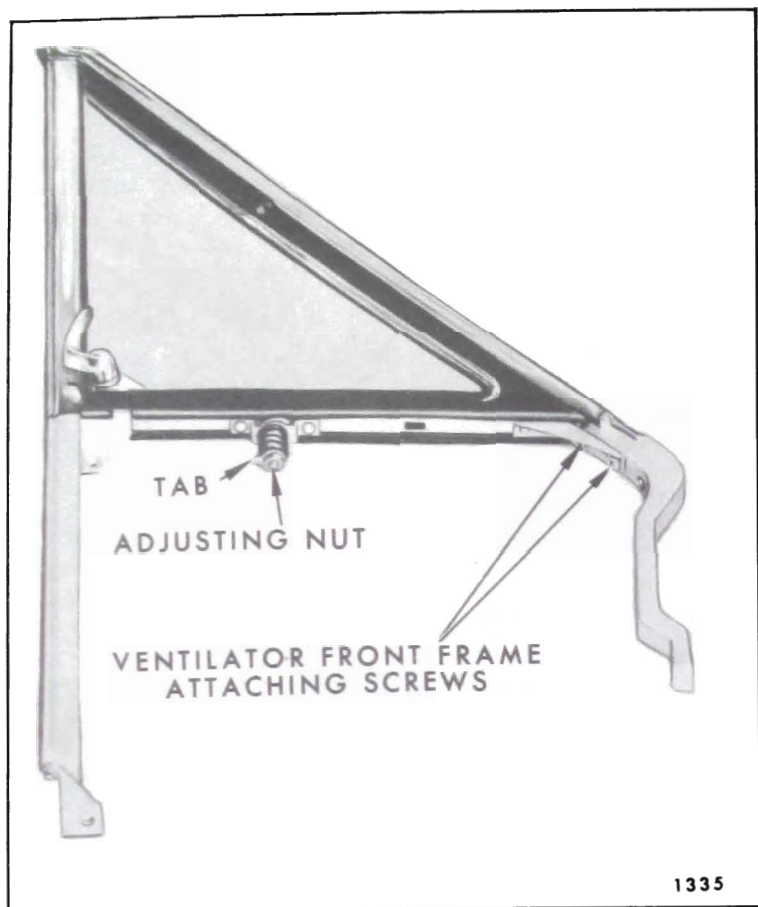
Front Door Ventilator Assembly - "A" Style
